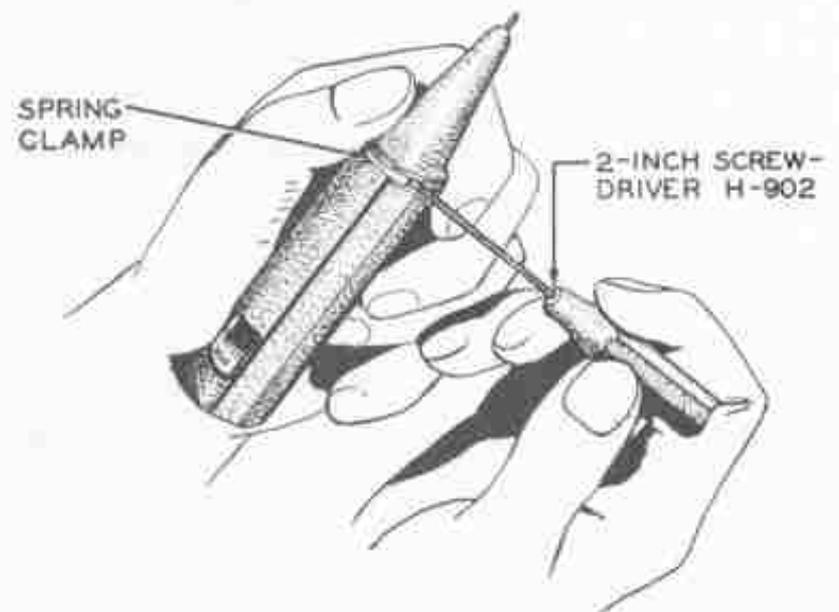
Resistance Indicator-Probe, Method of Removing Clamping Ring
